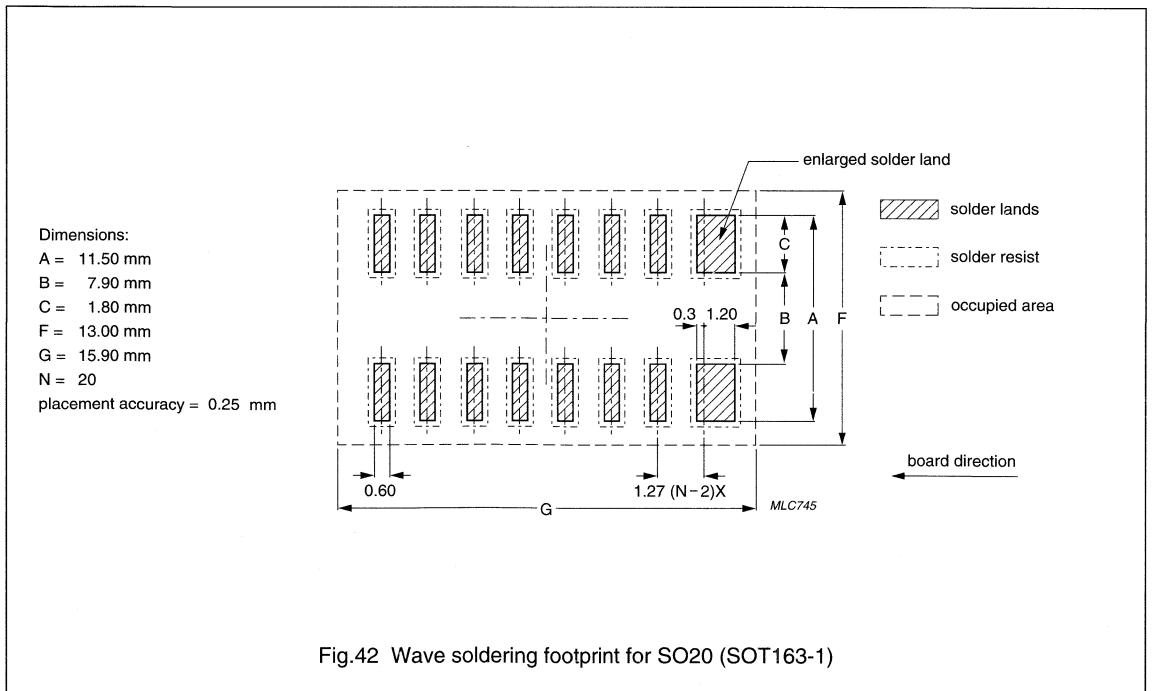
Wave soldering footprint for SO20 (SOT163-1)
